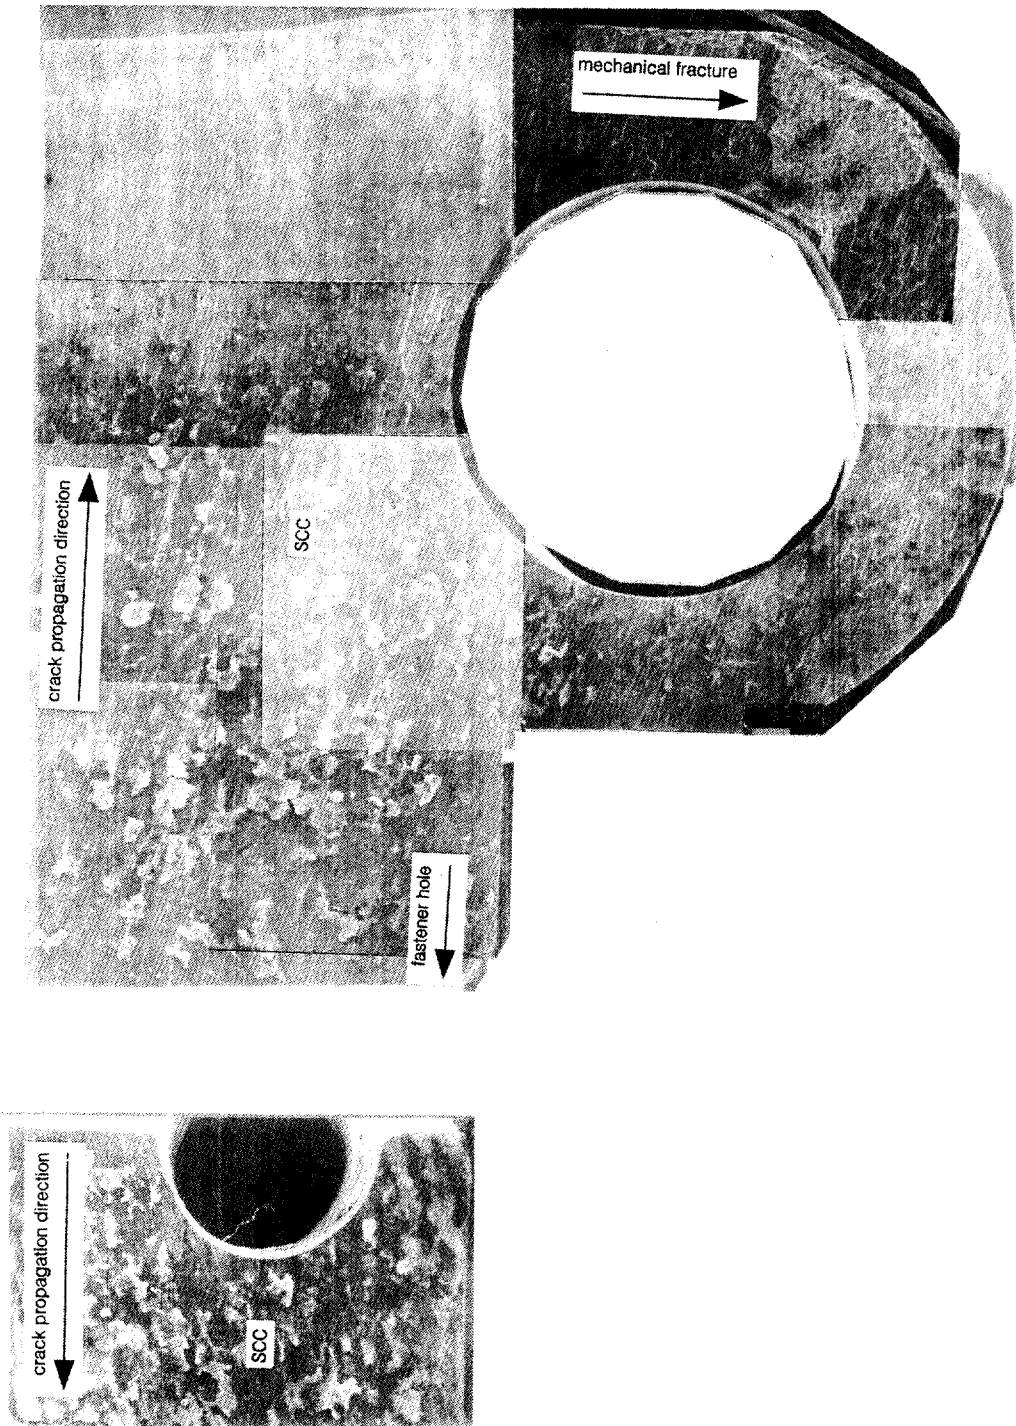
SEM fractograph of a cylindrical AA 7075-T6 Al-Zn-Mg-Cu alloy component.
